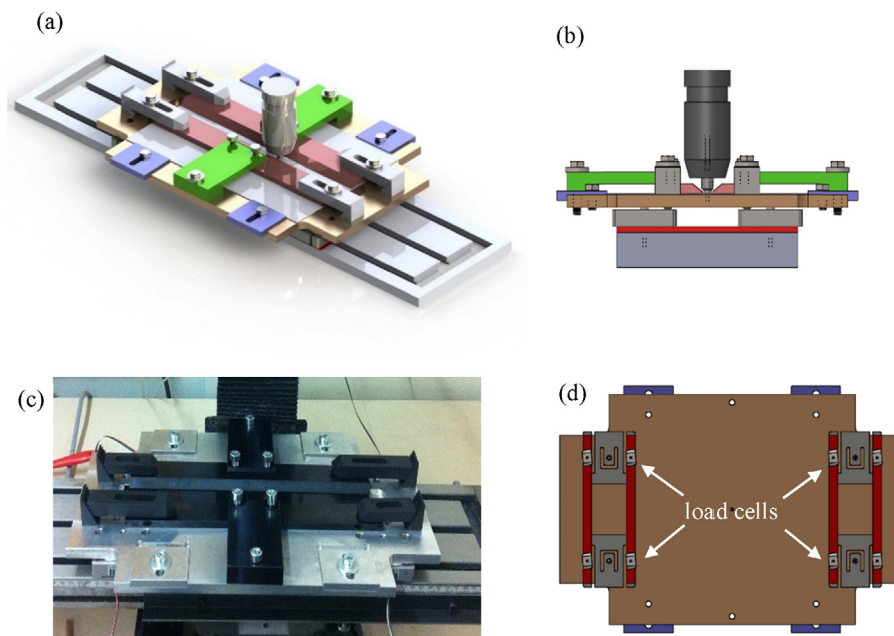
Fixing system: (a) isometric view, (b) front view (c) real image of the fixture on the CNC table and (d) detail of the load cells configuration.
